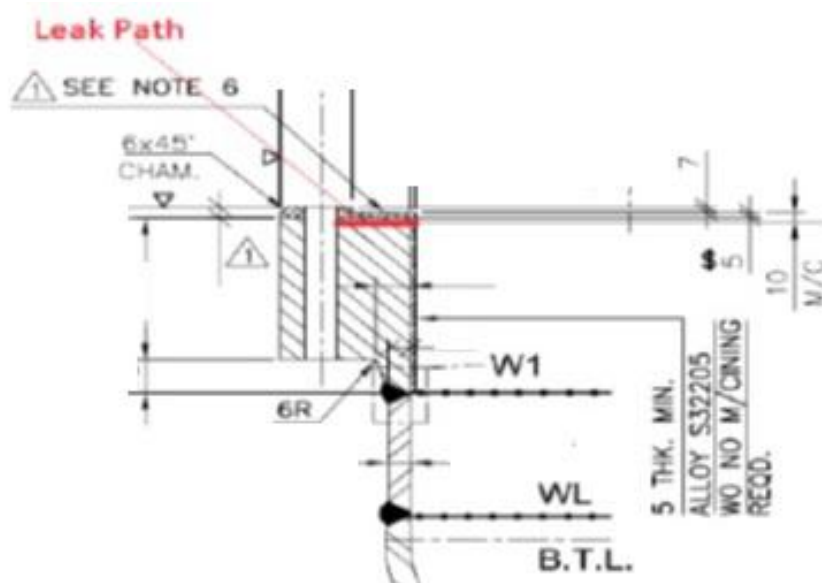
Extract from exchanger drawing indicating the leak path (in red)
